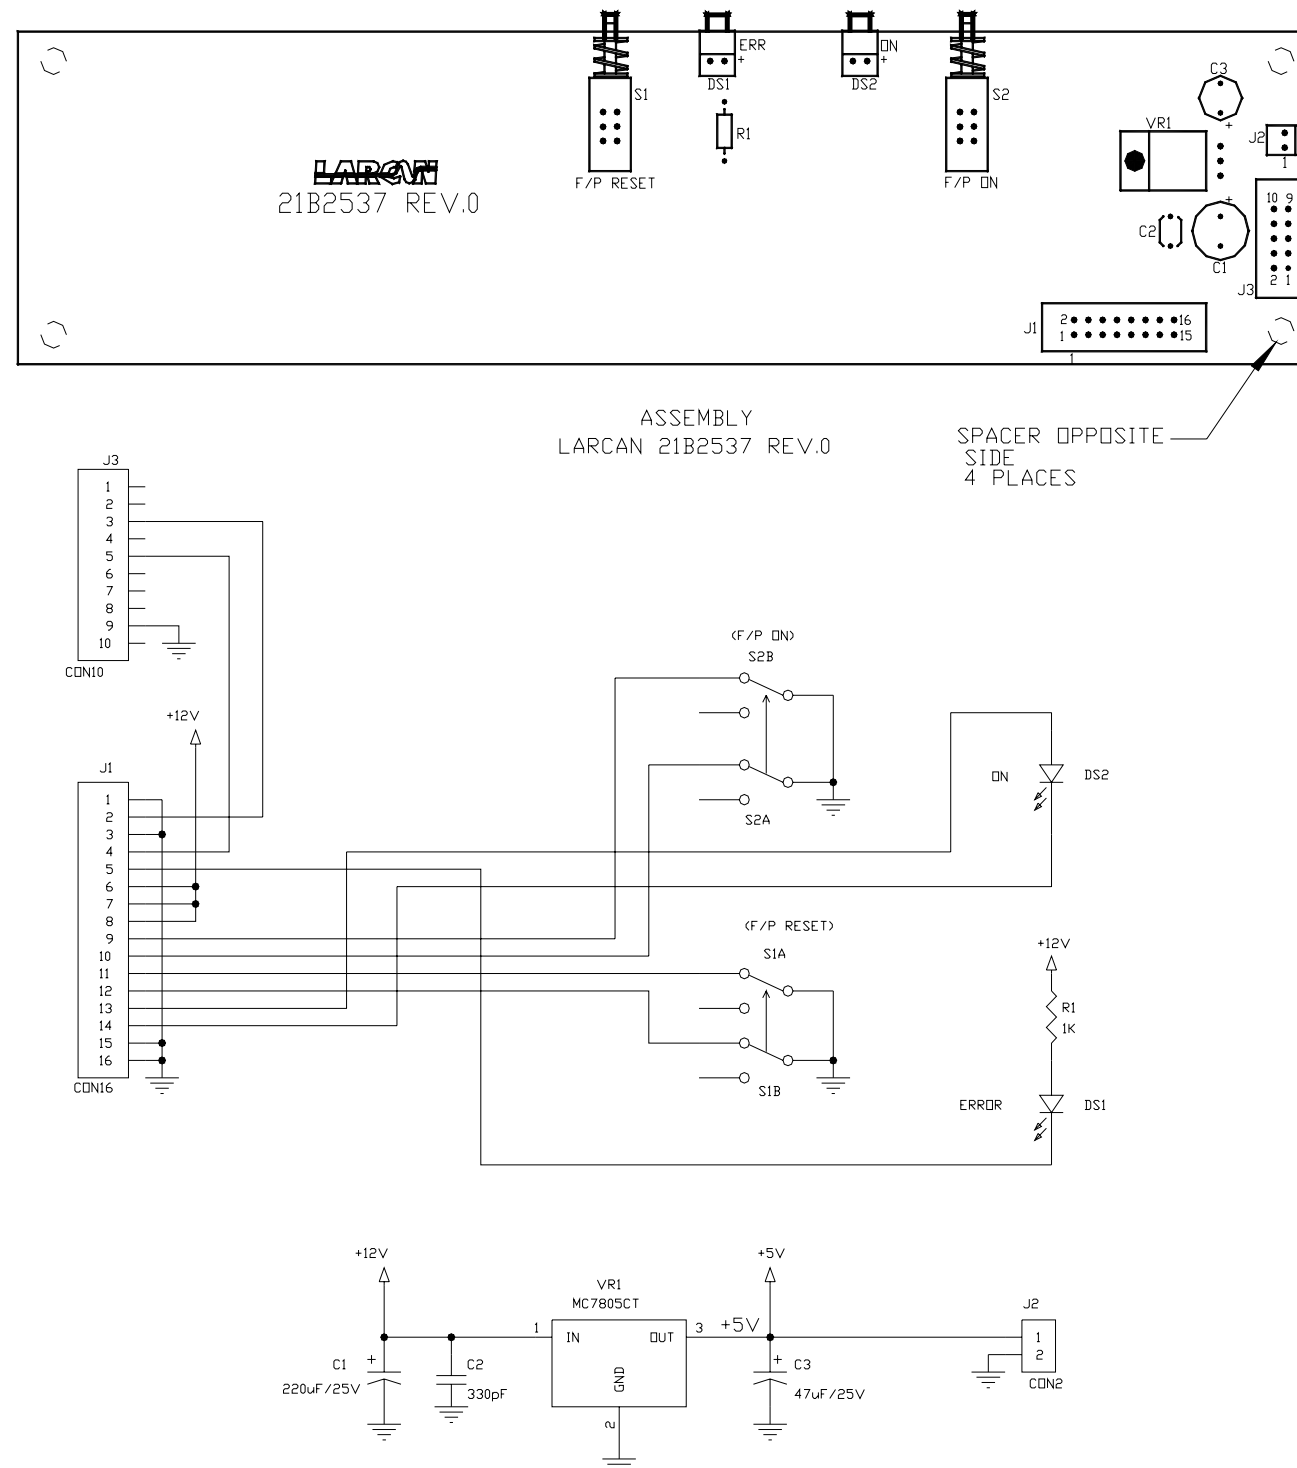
MXi Front Panel Interface Board Assembly 21B2537A1 and Schematic 21B2537S1
